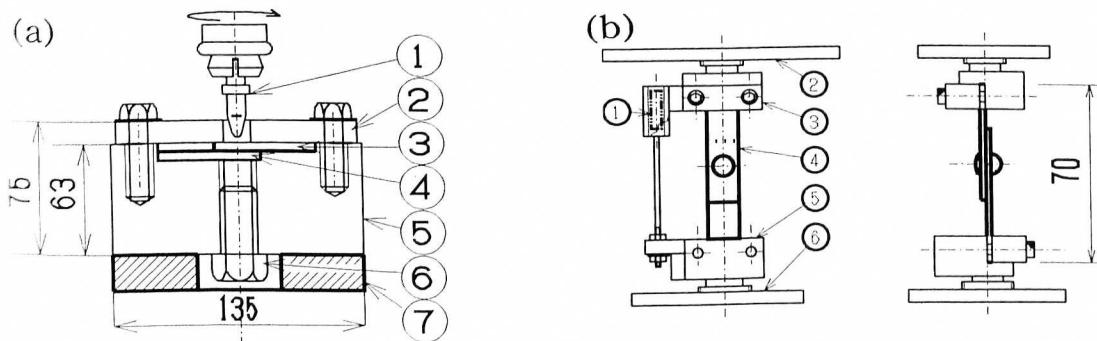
(a) Setting of the test piece. ① flowdrill, ② upper part, ③ test piece 1, ④ test piece 2, ⑤ down die, ⑥ bolt, ⑦ vice; Fig. 3 (b) Schematic of experimental apparatus for shearing force, ① differential transformer, ② upper beam, ③ jig, ④ specimen, ⑤ jig, ⑥ down beam.
